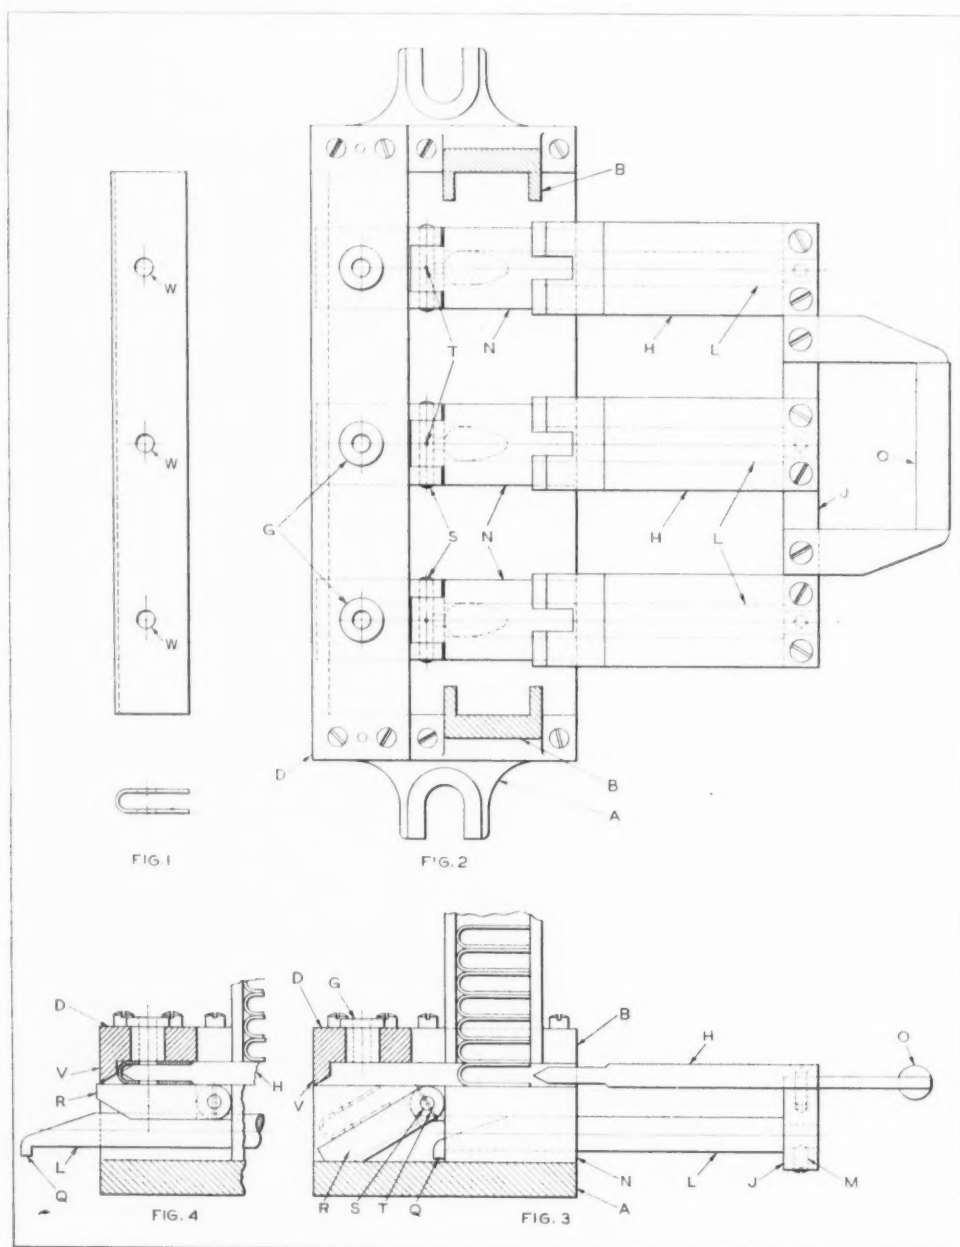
U-shaped Piece with Three Drilled Holes. Fig. 2. Plan View of Magazine-fed Jig Used in Drilling Three Holes *W* in Piece Shown in Fig. 1. Figs. 3 and 4. Views Illustrating Operation of Work-feeding Device
